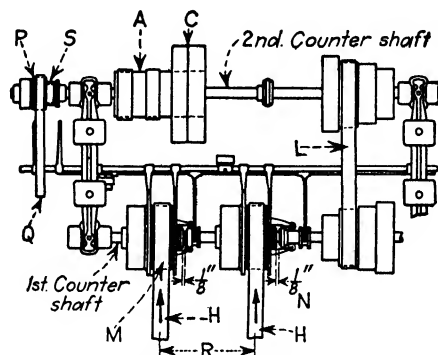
Countershafts No. 0 and No. 2 Brown & Sharpe.
